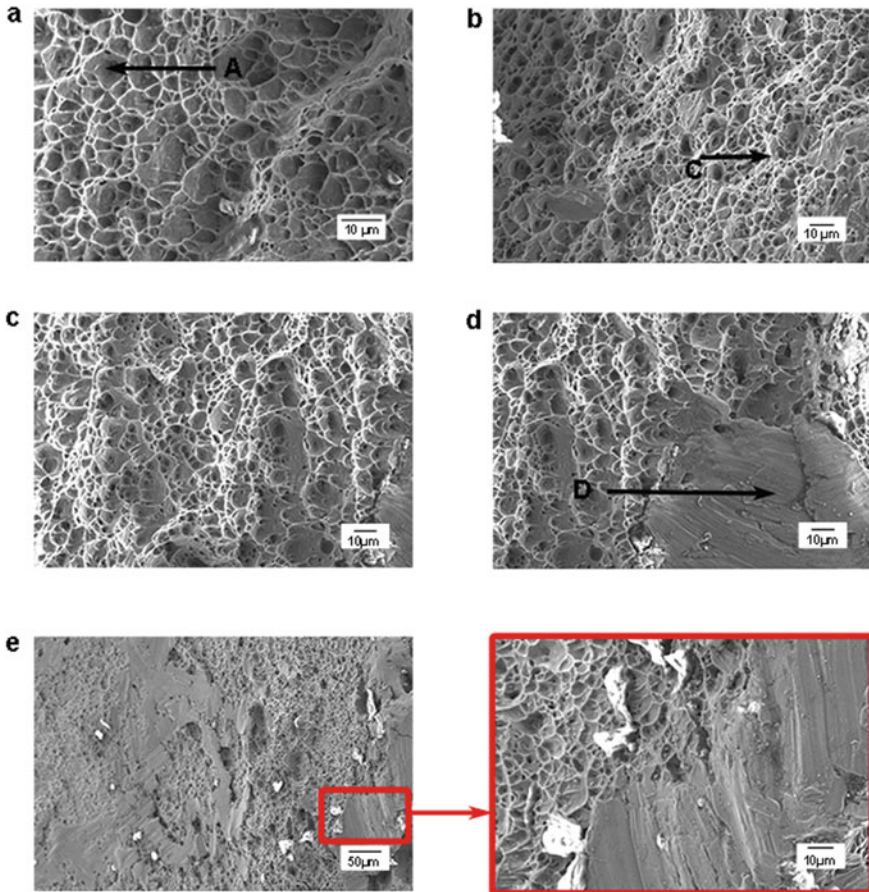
Fractography of the surface composite specimen (*A* indicates dimple fracture, *B* indicates secondary cracks, *C* indicates plastic deformation, *D* indicates quasi-cleavage fracture)
